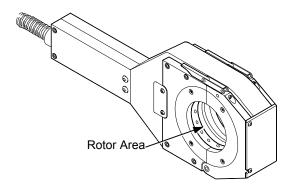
Inspect Exposed Surfaces of the Weld Head
